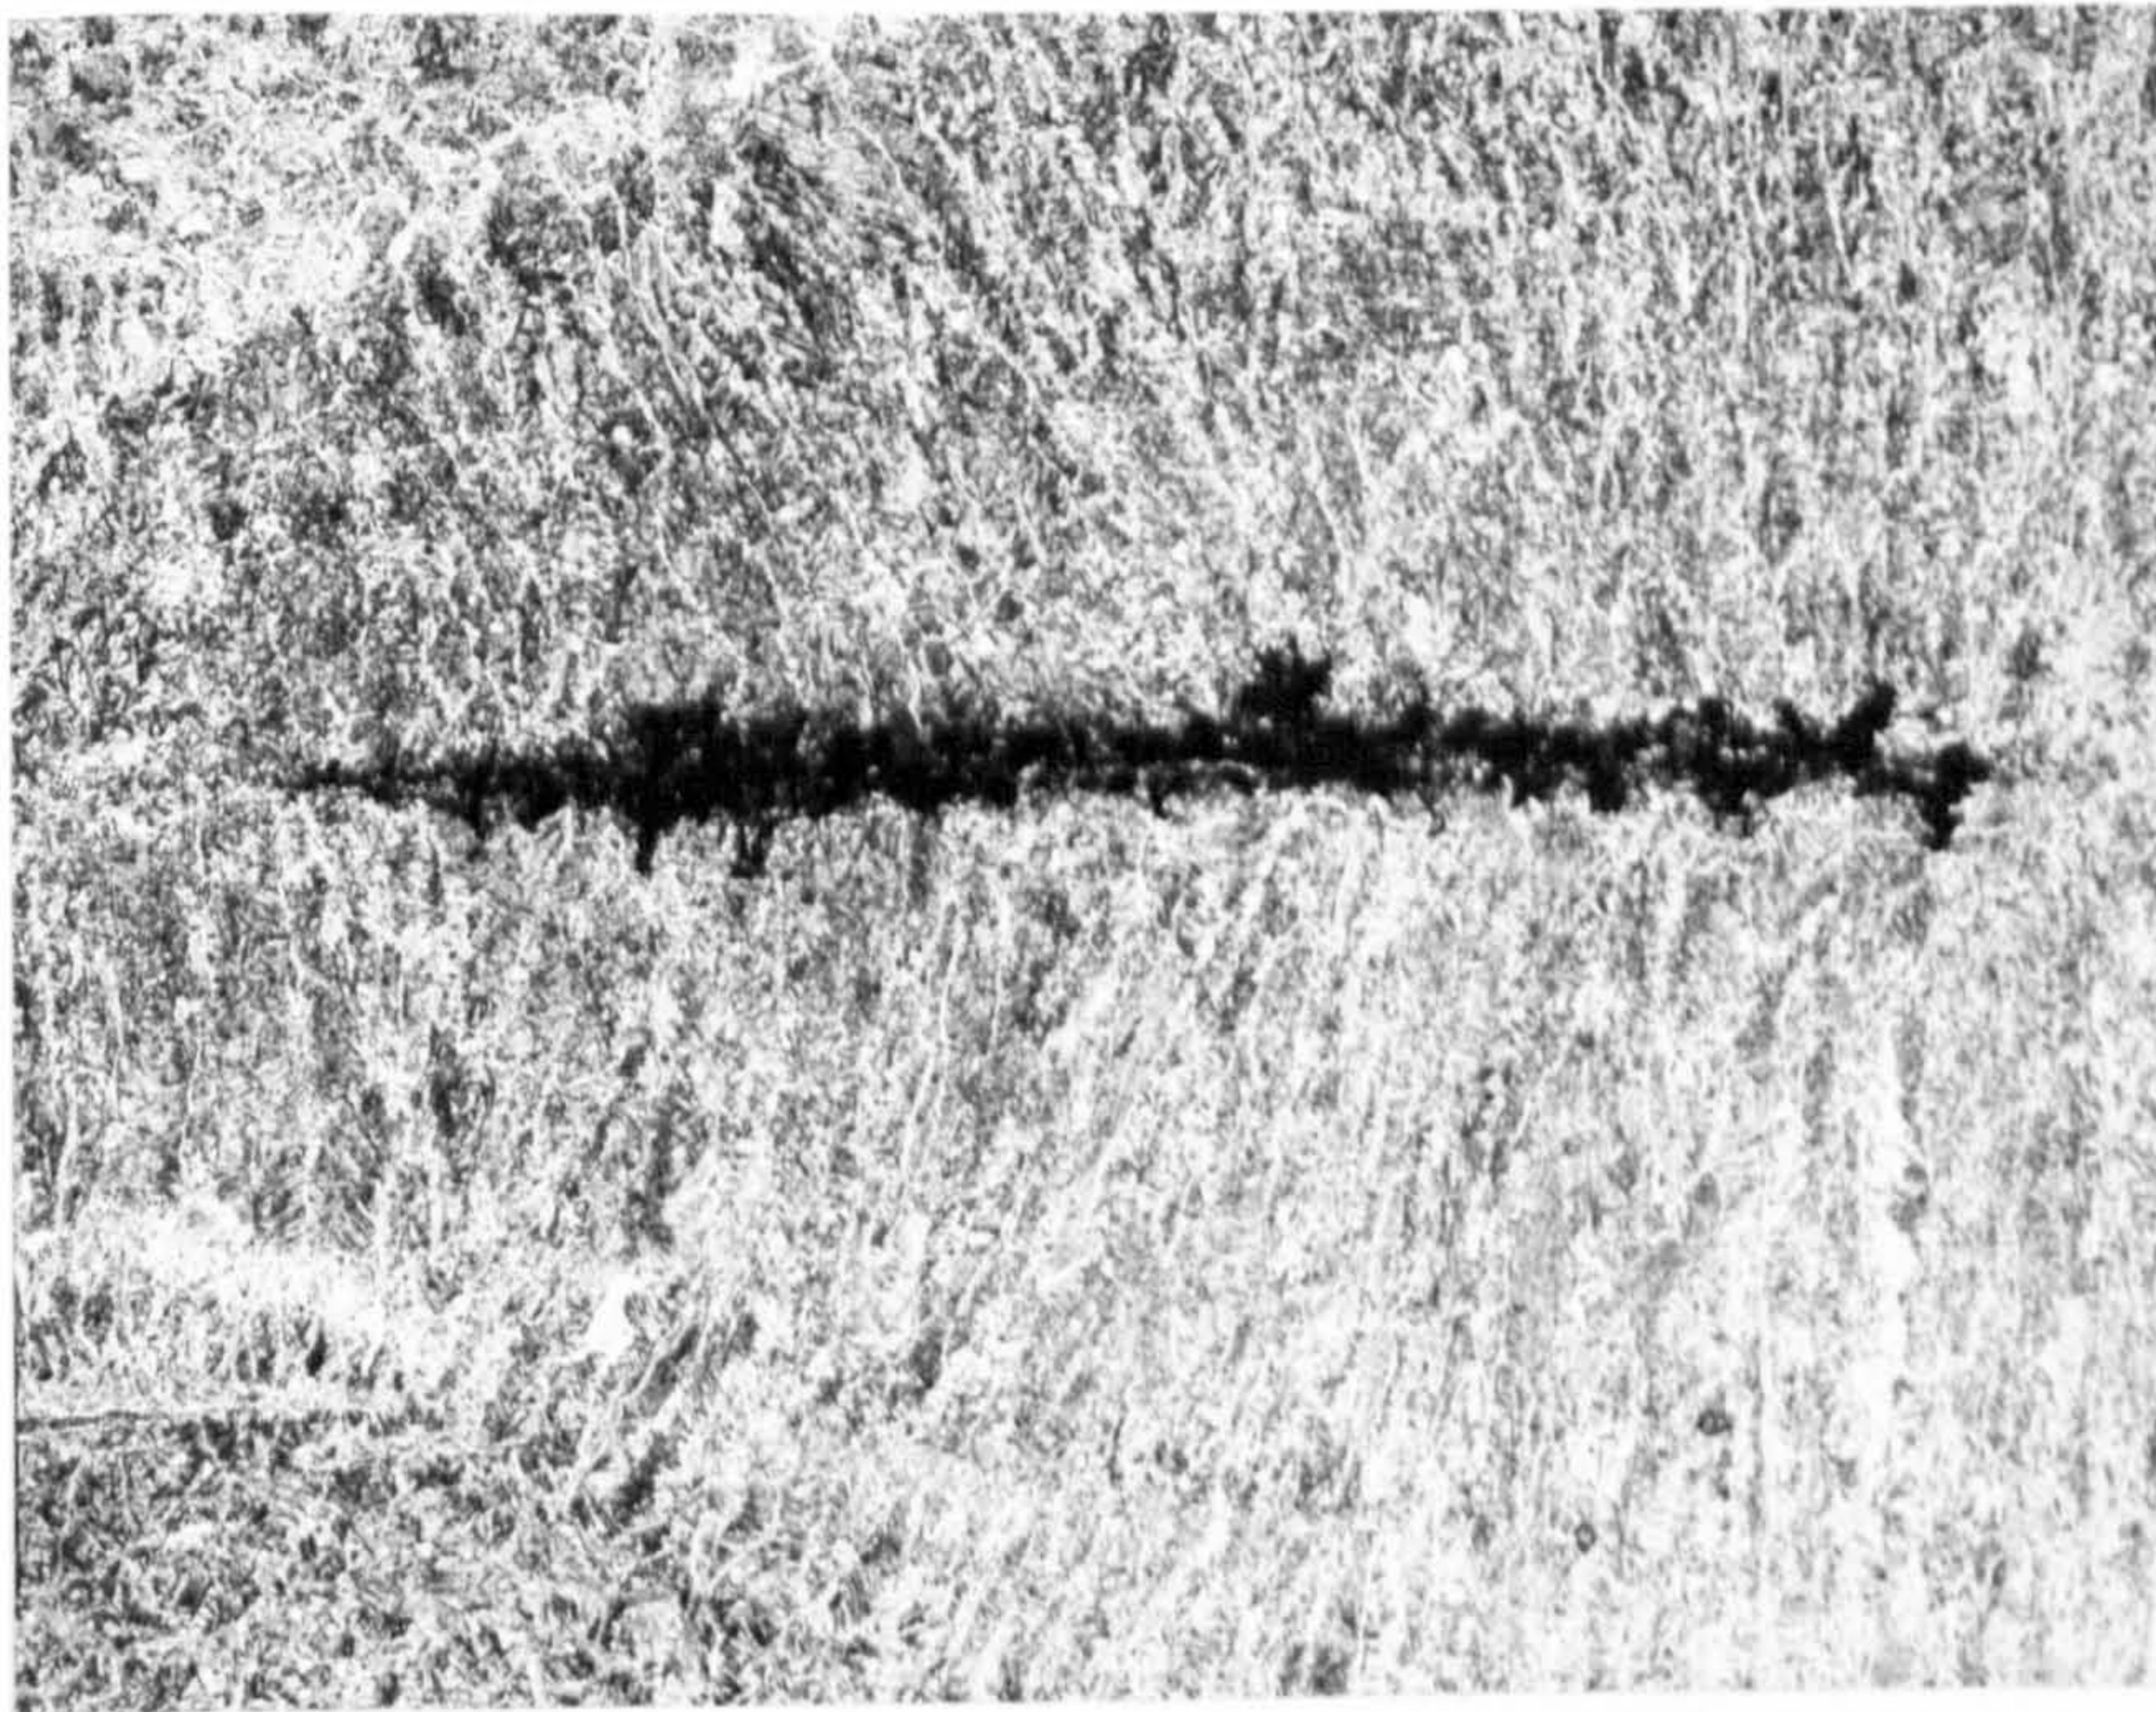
Solidification crack in 12mm skid weld, formed in weld centre (x40).
